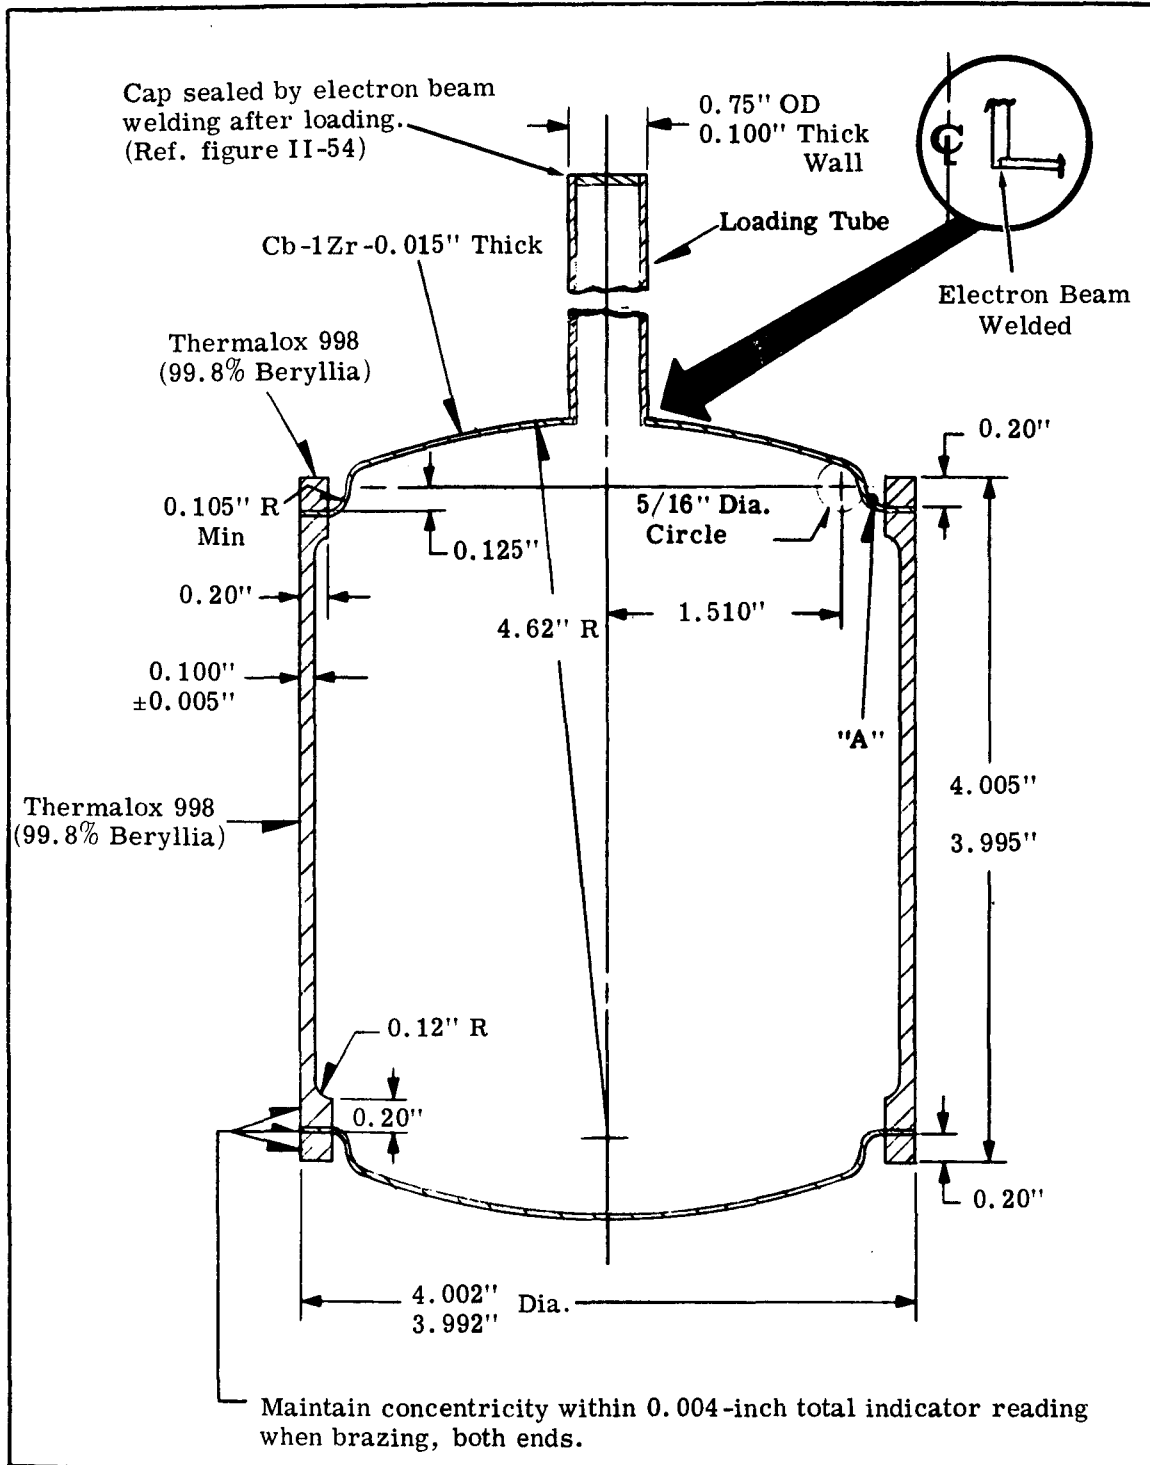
Design of the Bore Seal Capsule Used in the 10,000-Hour, 1300° F Endurance Test
